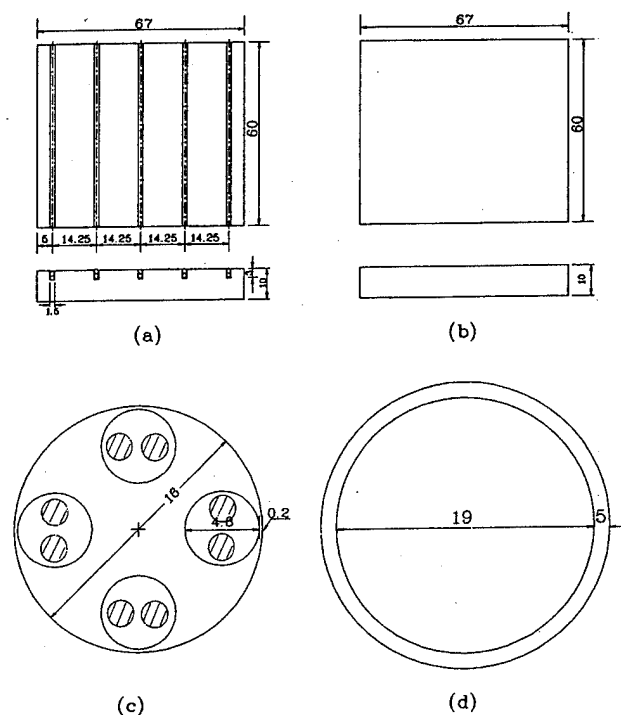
Geometry and dimensions for top and side view of planar magnetizing fixture (a), top and side view of planar backyoke (b), top view of circular magnetizing fixture (c), and top view of the circular backyoke (d). Dimensions are in millimeters.
